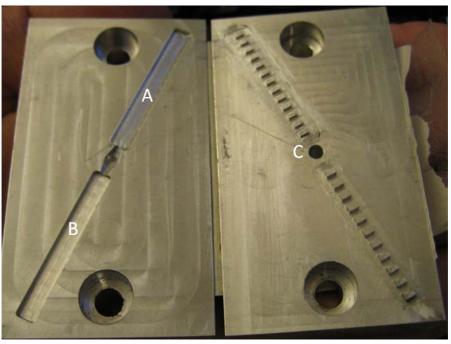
A mould for manufacturing the perforated part of the band in two different dimensions, 0.5 mm and 1 mm. A: Cavity for the thinner perforated band. B: Cavity for the thicker perforated band. C: Inlet into the mould. Photograph by O. Höglund.
